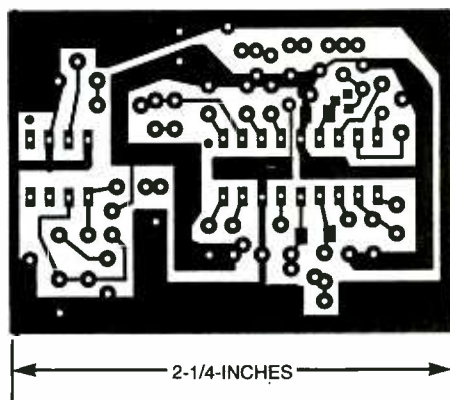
The PC board for the FM/TV Audio Receiver is a double-sided board that any hobbyist can build; the component side is a solid ground plane.
